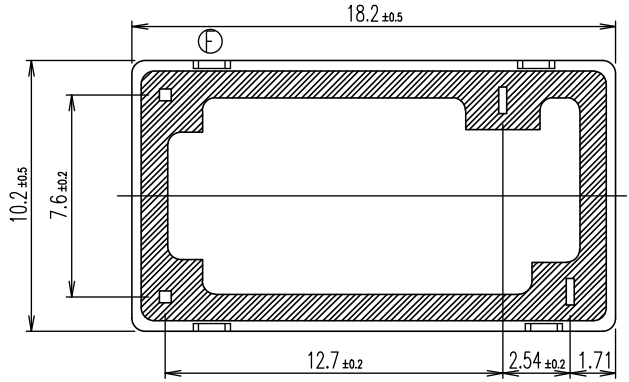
FIGURE FOR PRINTED CIRCUIT BOARD PROCESSING (BOTTOM VIEW)
